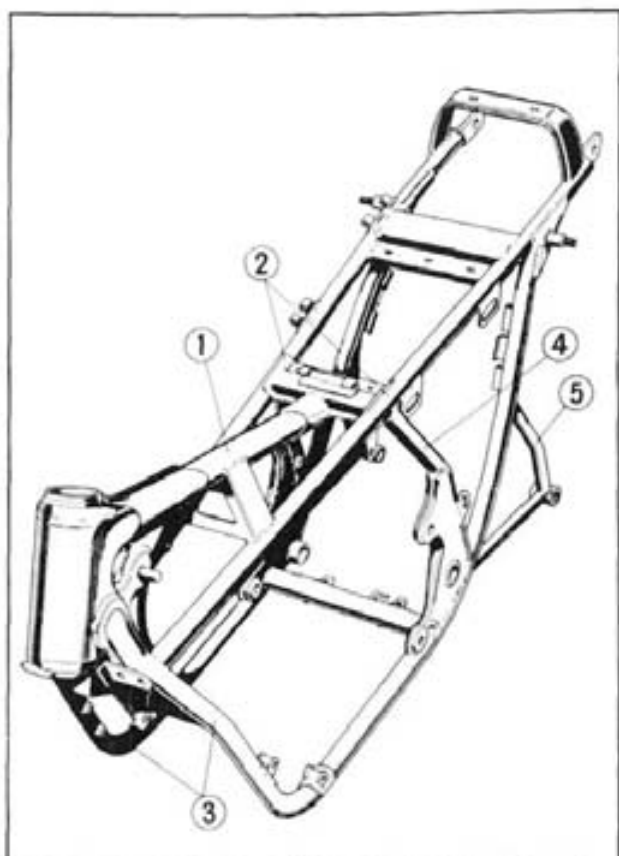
① Main pipe ② Sub tube ③ Under sub tube ④ Center pipe ⑤ Muffler setting stay
